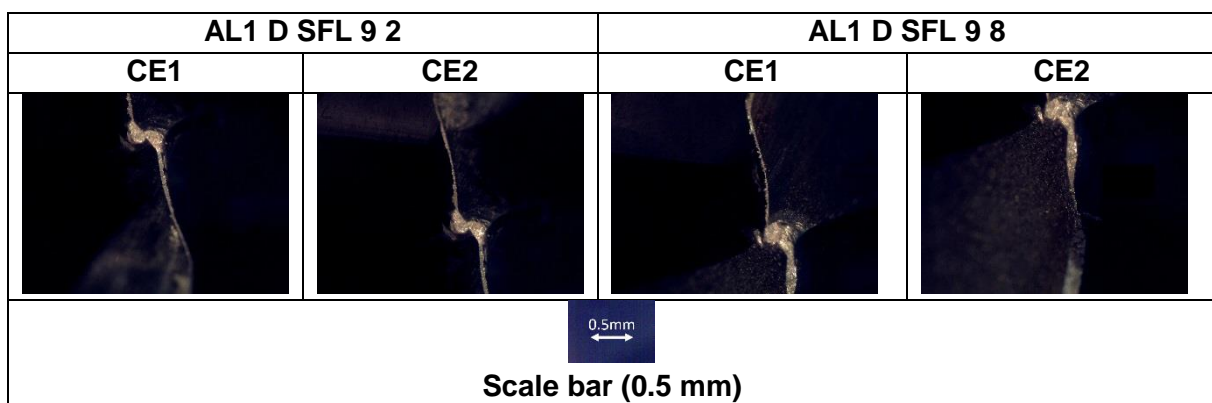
Flank wear on cutting edges (AL1 D SFL 9 2) and flank wear on the chisel edge (AL1 D SFL 9 8) straight flute drills for 6082-T6
